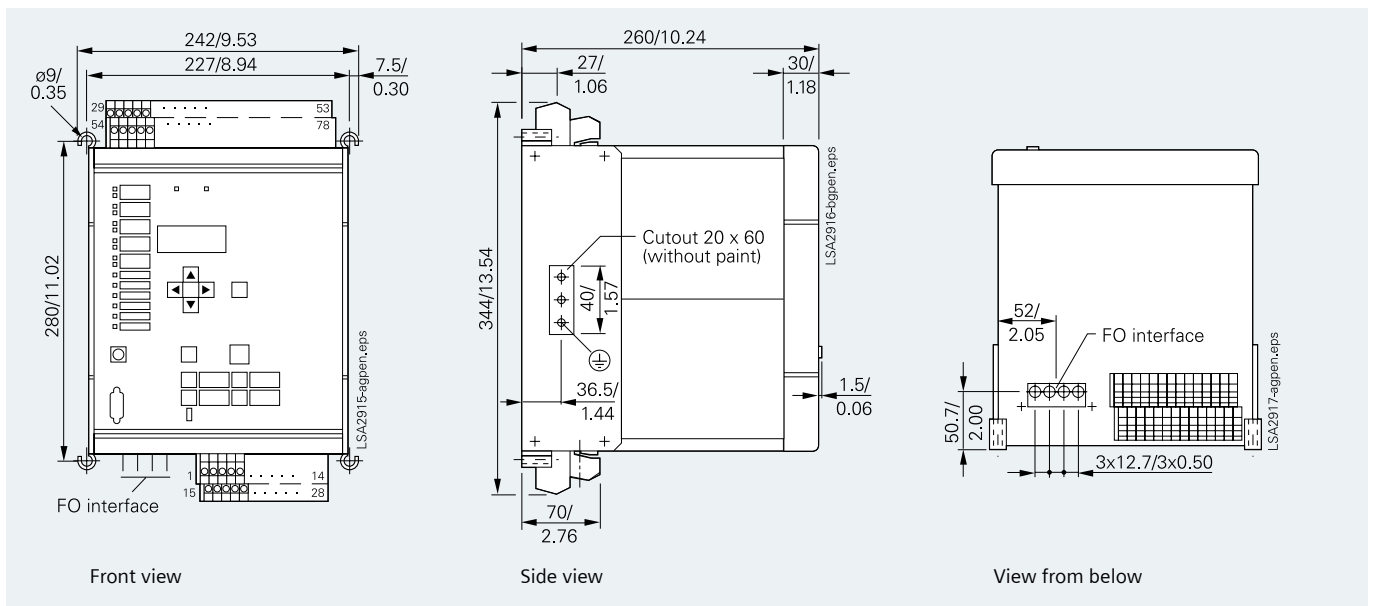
/26 Dimensional Drawing of a 7SJ66 for Panel Flush and Cubicle Mounting (Housing Size D)
